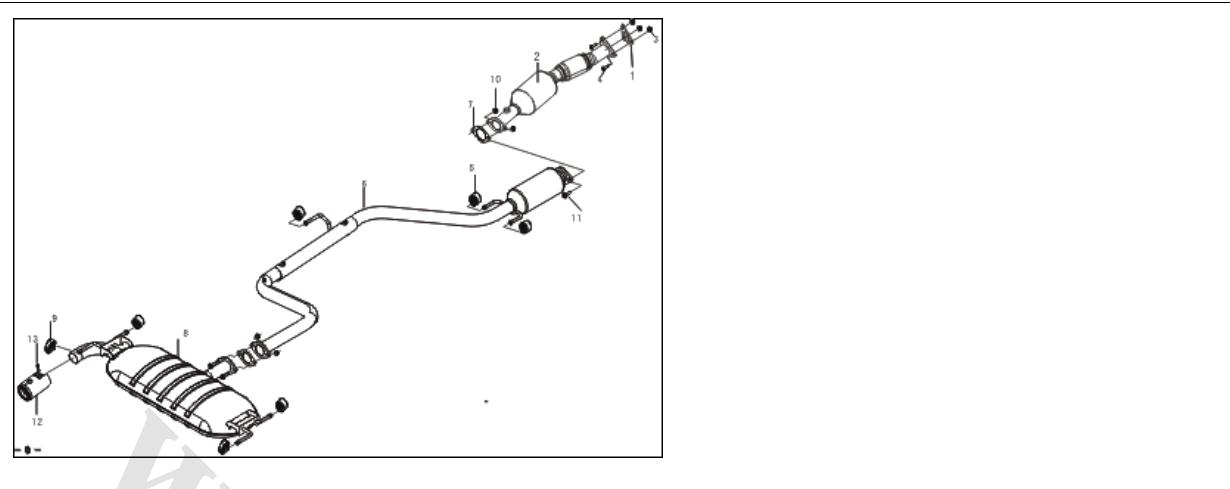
Removal Order of Exhaust Pipe and Muffler
